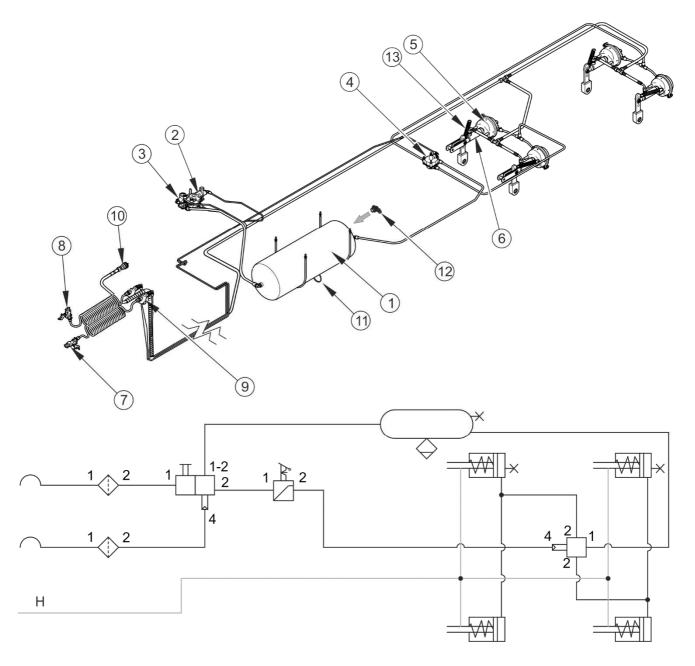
Design and diagram of combined braking system (double conduit pneumatic braking system + single conduit hydraulic braking system)
